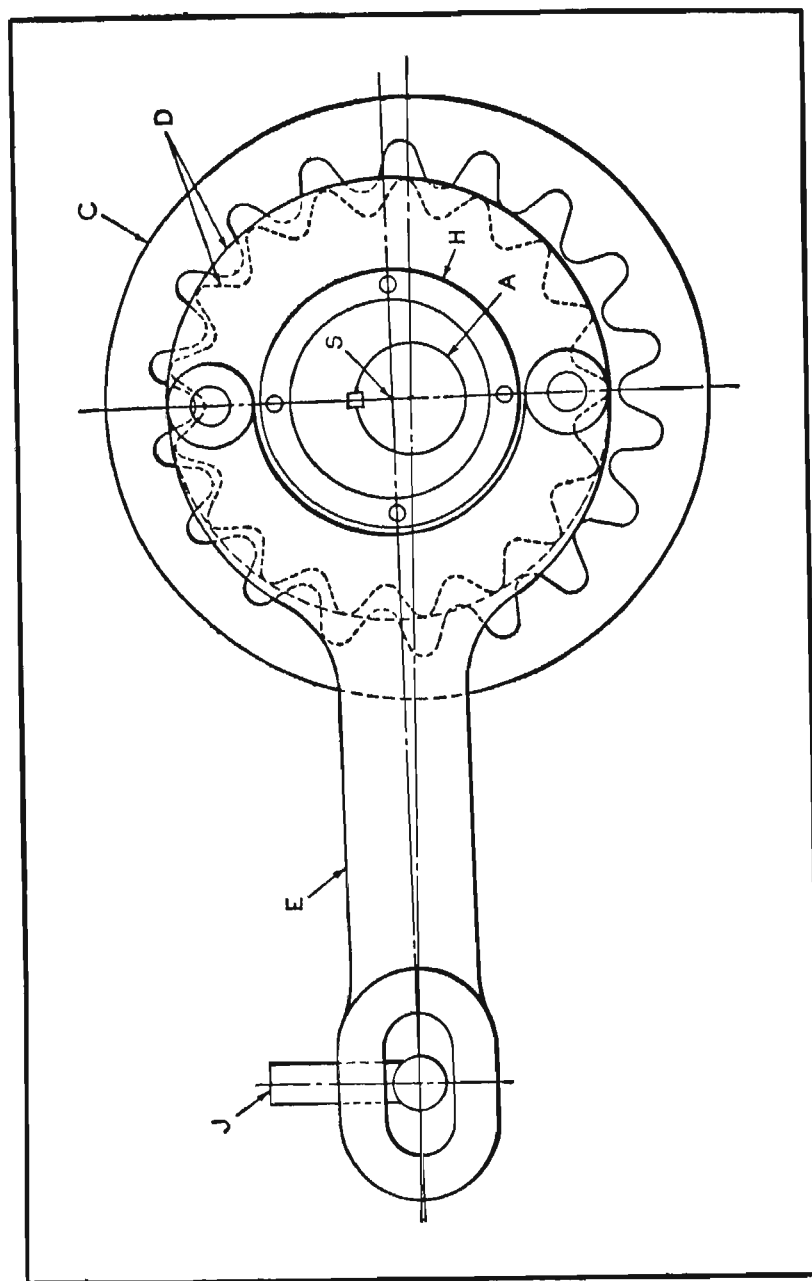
Wobble Gear, Piston, Strap and Locator of Mechanism Shown in Fig. 12.
